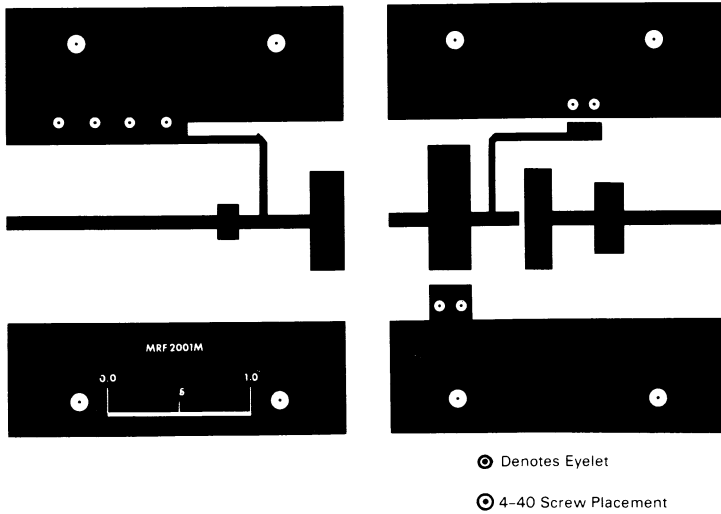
PRINTED CIRCUIT BOARD LAYOUT — 2.0 GHz TEST CIRCUIT
